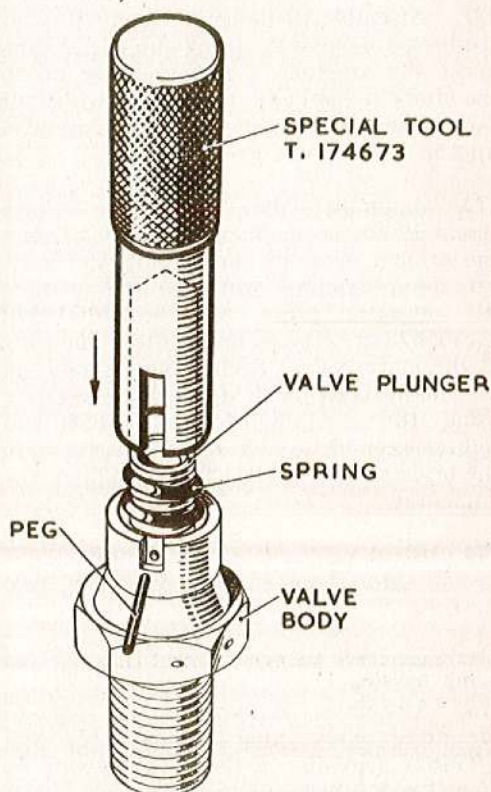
Assembling or dismantling bleed valve, using tool T.174673
